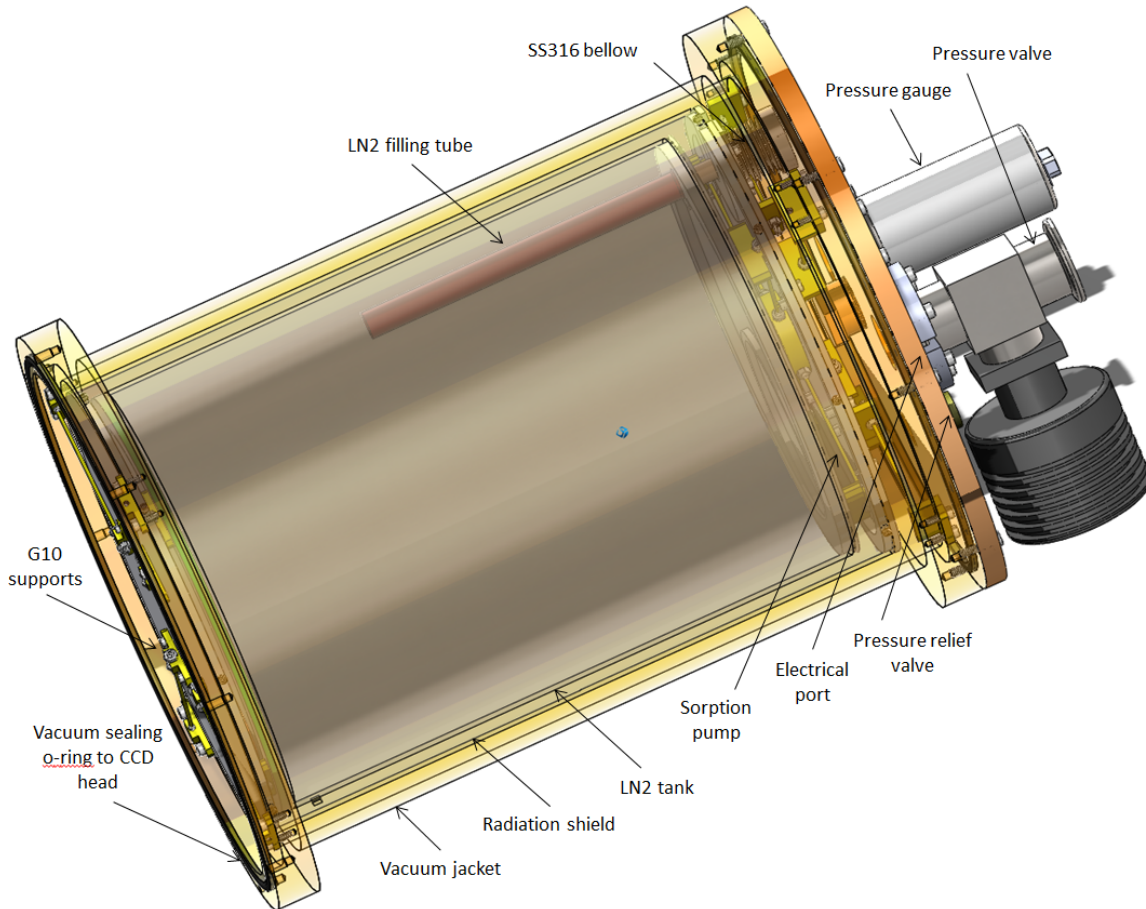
View of MEGARA cryostat dewar back. The vacuum valve and vacuum sensor (pressure relief valve is not visible) are visible on the back; on the central part is the radiation shield and LN2 tank with filling tube; on the front part are the cold-plate and radiation shield held by G10 supports, from this side the dewar back is coupled to the CCD-head.
